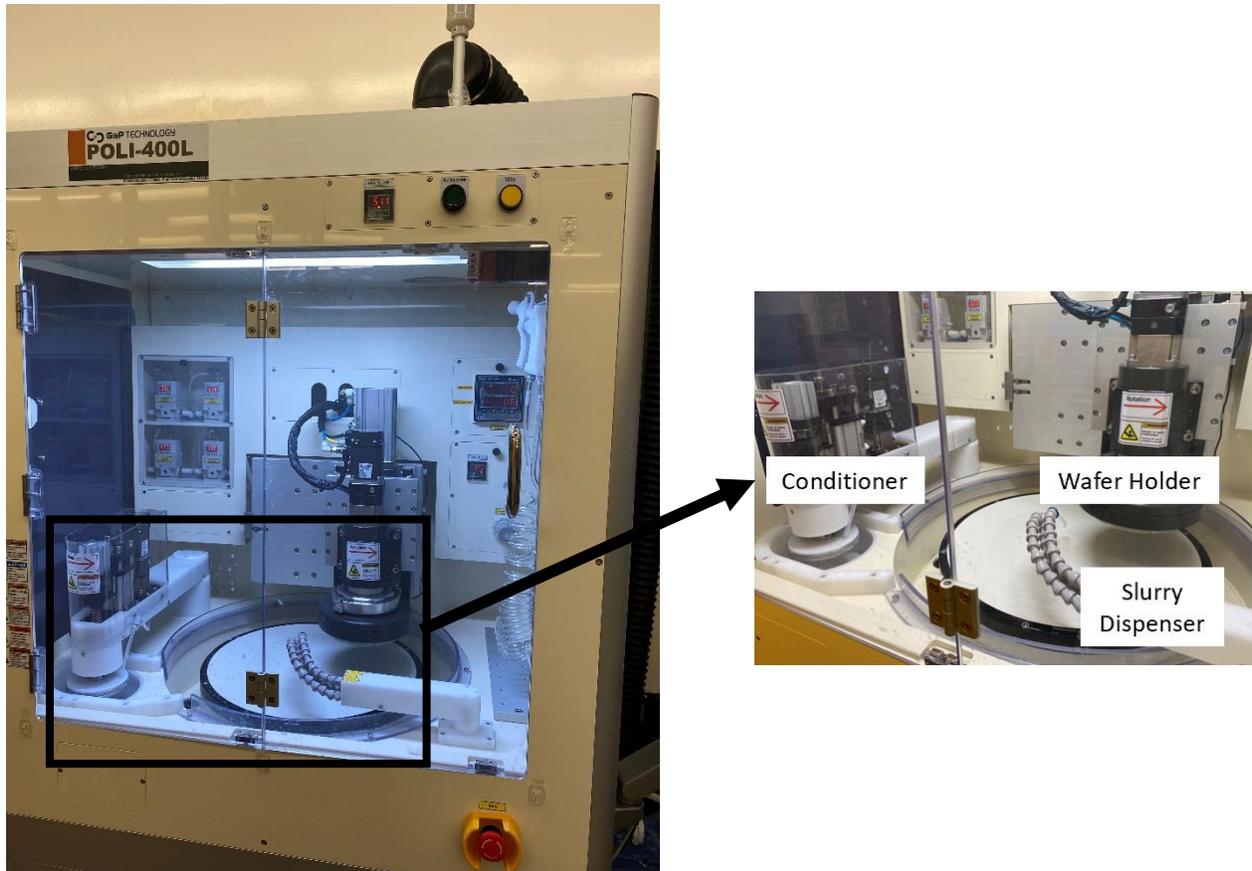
G&P POLI-400L CMP tool and its major components.
